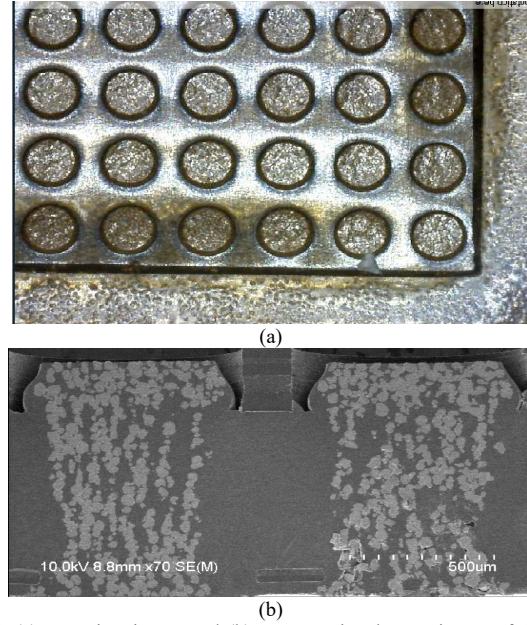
(a) Top view image and (b) cross-sectional SEM image of the non-coaxial elastomer socket.
